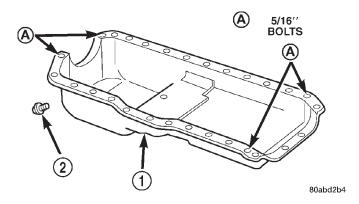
Position of 5/16 inch Oil Pan Bolts
